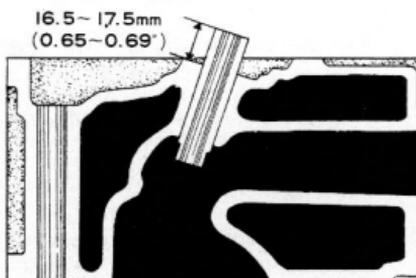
Valve Stem Guide X4933 Extrusion (Exhaust)
